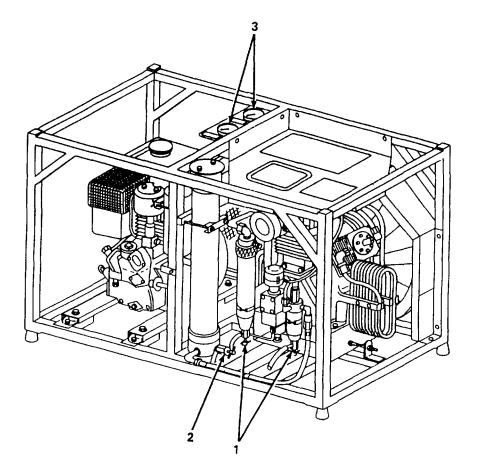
Air Compressor Assembly, Controls and Indicators.
